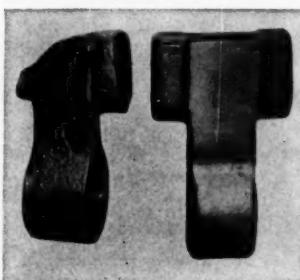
After crushing the same amount of abrasive material in a hammer mill, the badly worn steel casting (left) had a weight loss of 37 per cent while the high-chromium iron casting (right) lost only 5.5 per cent.
